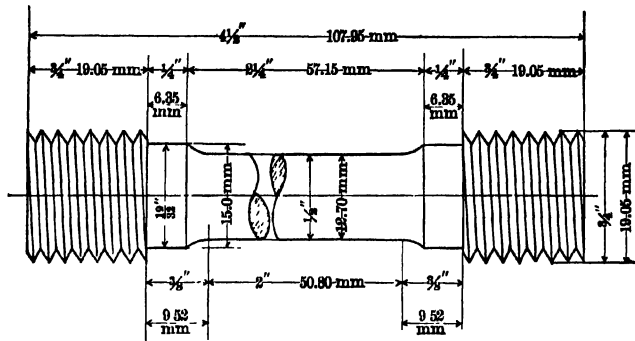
SHORT FORM OF STANDARD TENSION-TEST SPECIMEN.
